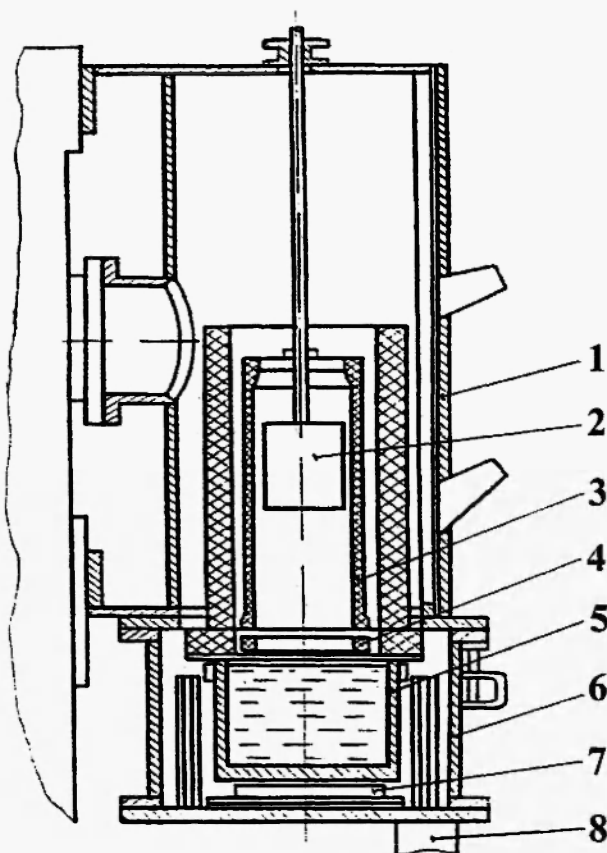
A schematic drawing of the high gradient DS unit. 1 – upper chamber; 2 – ceramic mould; 3 – mould-heating furnace; 4 – second zone heater; 5 – bath with liquid metal coolant; 6 – bottom chamber; 7 – bottom heater; 8 – lifting mechanism.
